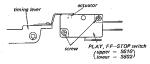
PLAY, FF-STOP switch (S602, 610) position adjustment
